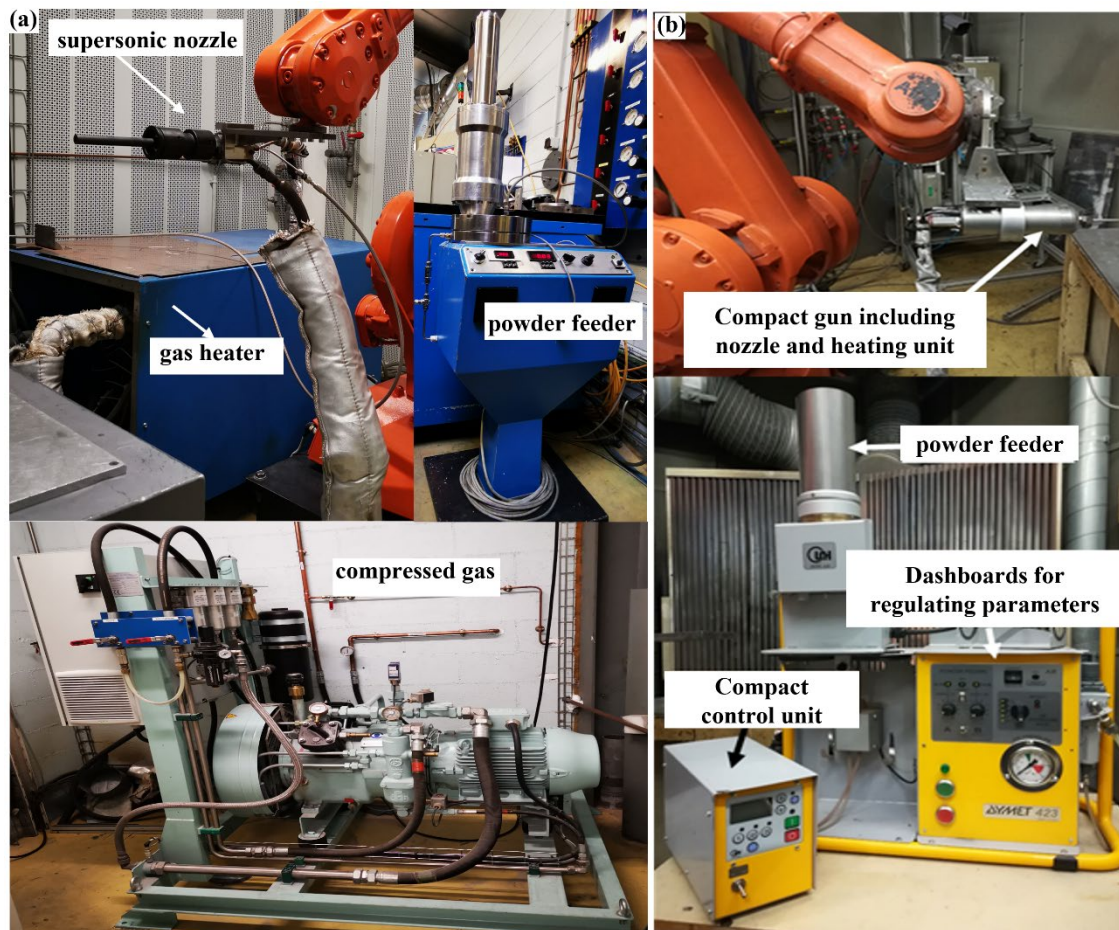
The spraying systems: (a) HPCS; (b) LPCS
